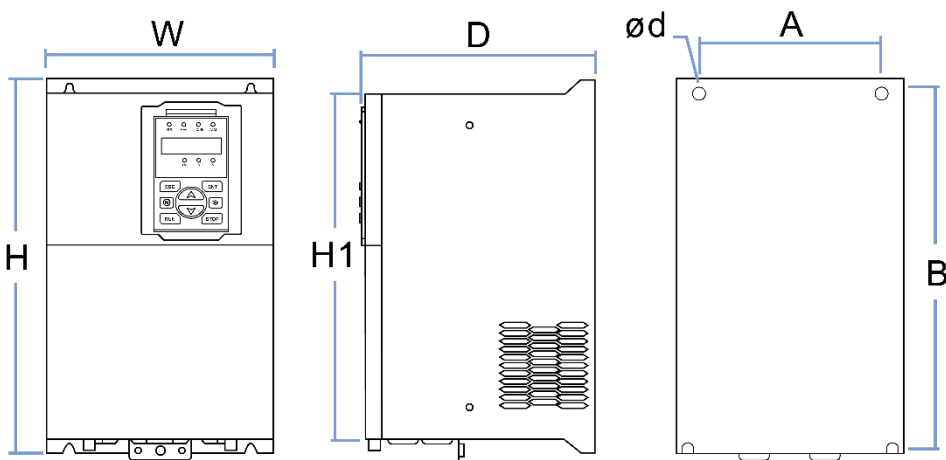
SIZE D~G(18.5KW-90KW) Dimension
